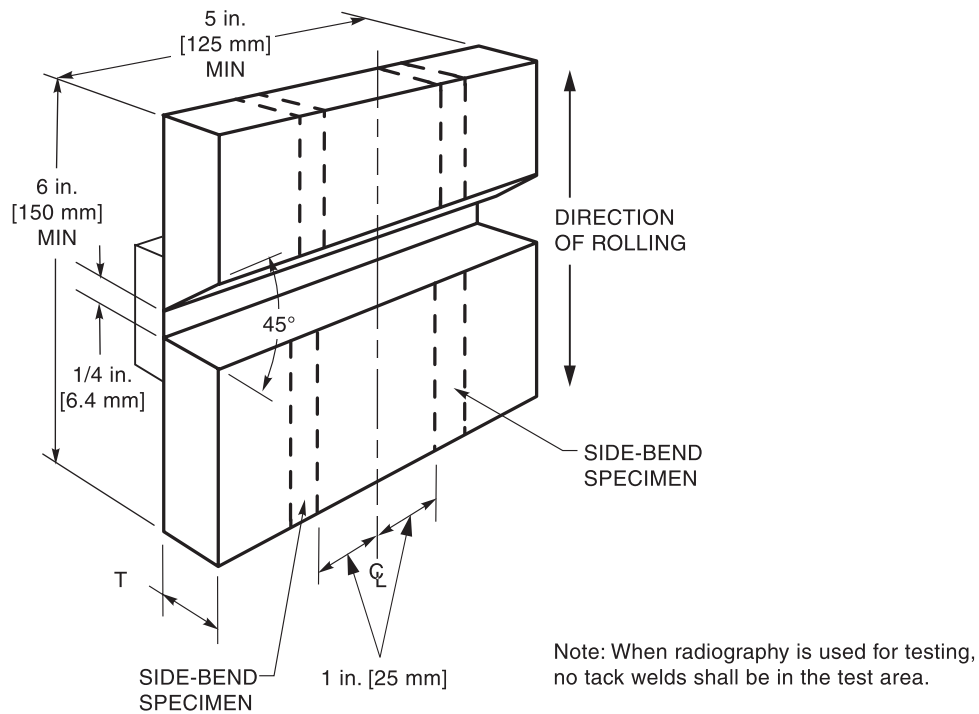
B—Optional Test Plate for Unlimited Thickness, Horizontal Position—Welder Qualification
